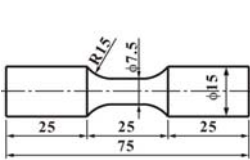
Shape and dimensions of fatigue test specimen (in mm)
